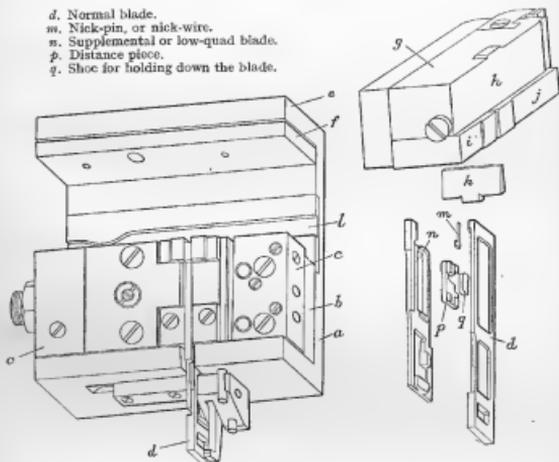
Monotype mould ; low-quad, double-blade. Scale: about half size.
